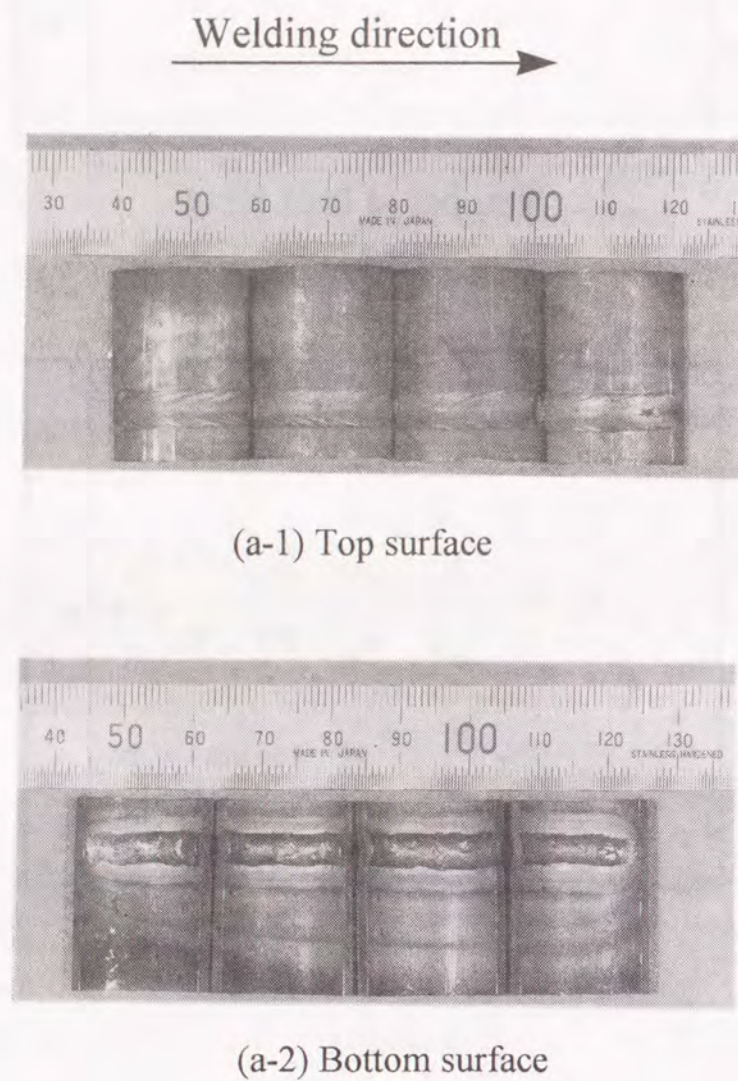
Appearance of top and bottom surface after welding on mild steel pipe
